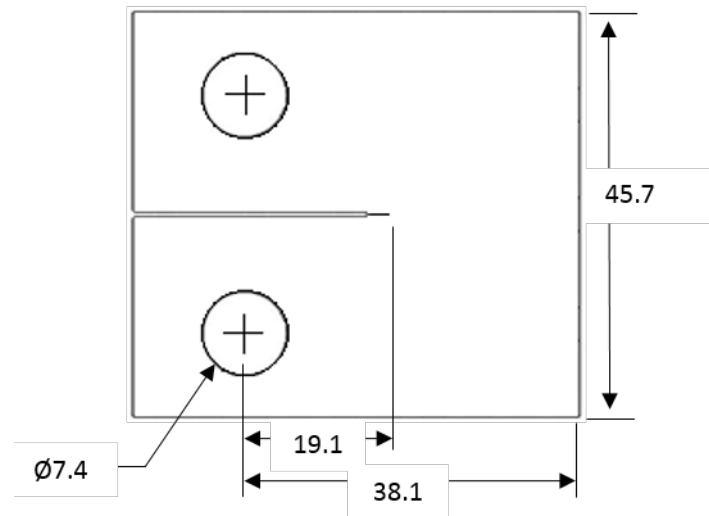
Schematic and dimensions (in mm) of compact tension specimen. The specimen is 12.7 mm thick.
